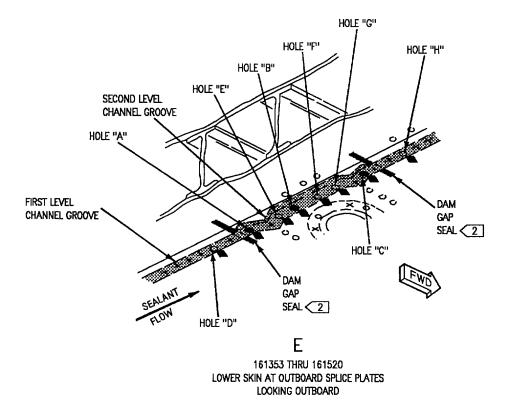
Lower Skin Channel Groove Seal Injection (Sheet 6)
